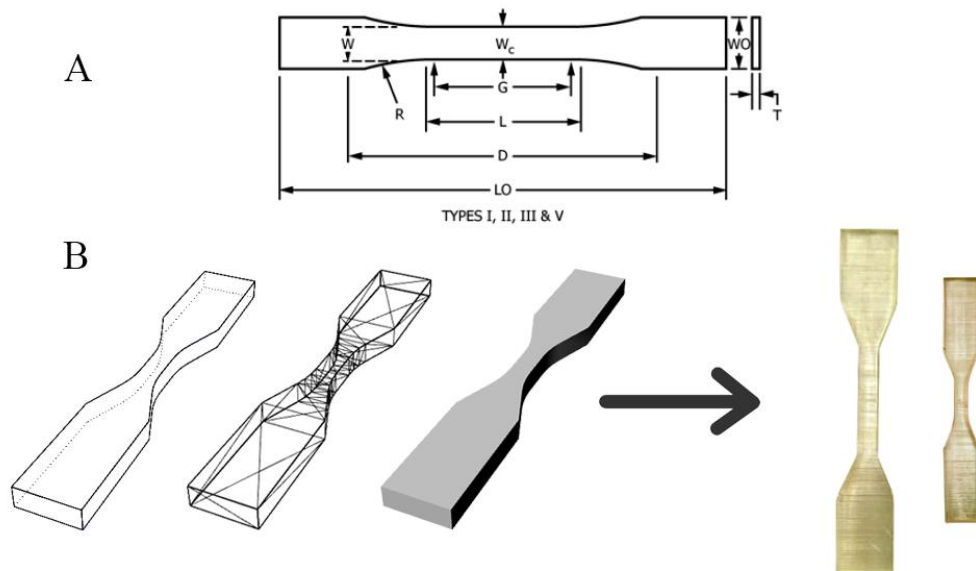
Dumbbell-shaped test specimen A) design dimensions B) modeled specimens in Rhinoceros 3D and final 3D printed ones.
